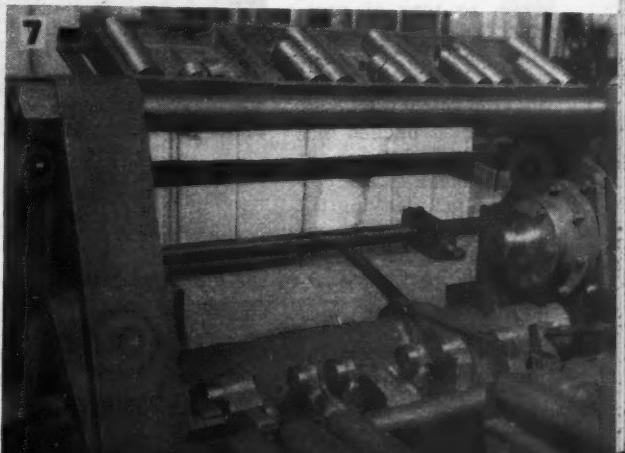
This machine presses five cam bearings into place in the cylinder block.
